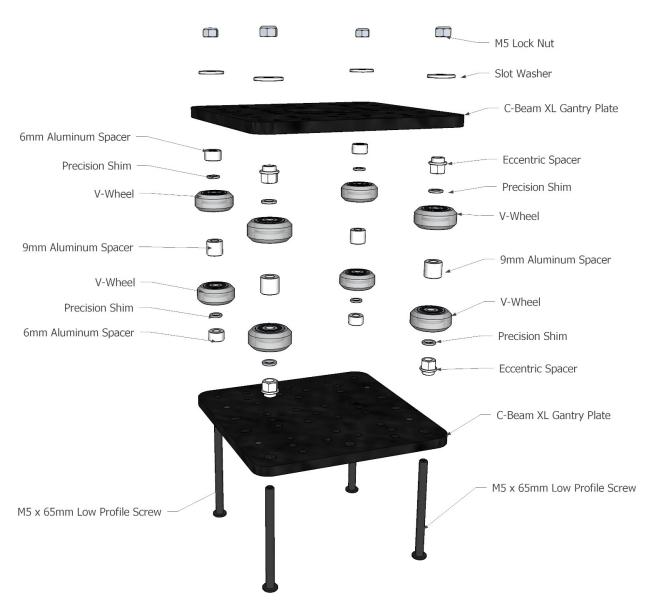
X-Axis Gantry Plate Assembly: Exploded View
